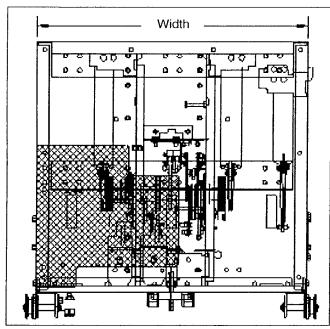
Typical Circuit Breaker Front View with CloSure[™] Tool Attached (approximate mechanism chassis width)
